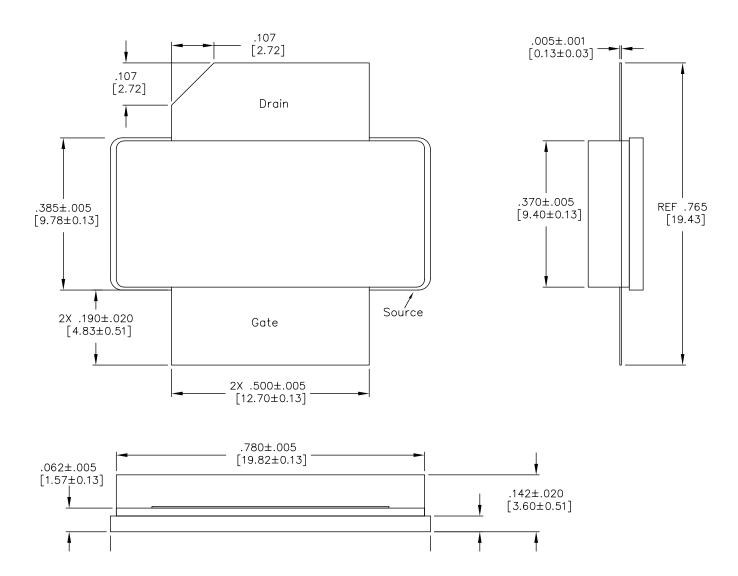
AC780P-2 Metal-Ceramic Package Dimensions and Pinout (all dimensions are in inches [mm])
